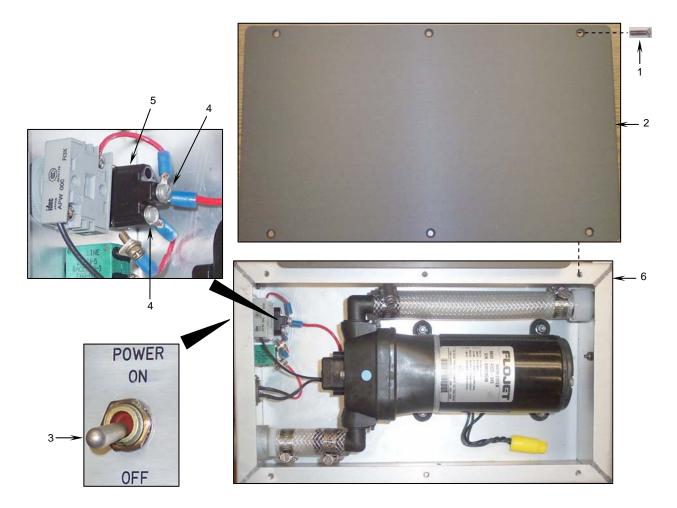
Testing the Sink Fill Pump Assembly Power Switch.
